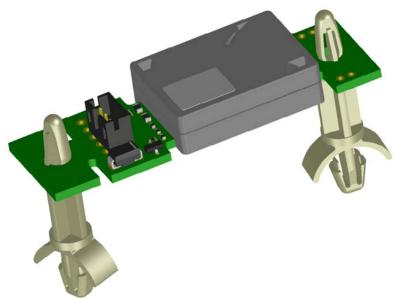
Mechanical drawing SenseAir® S8-4B.
